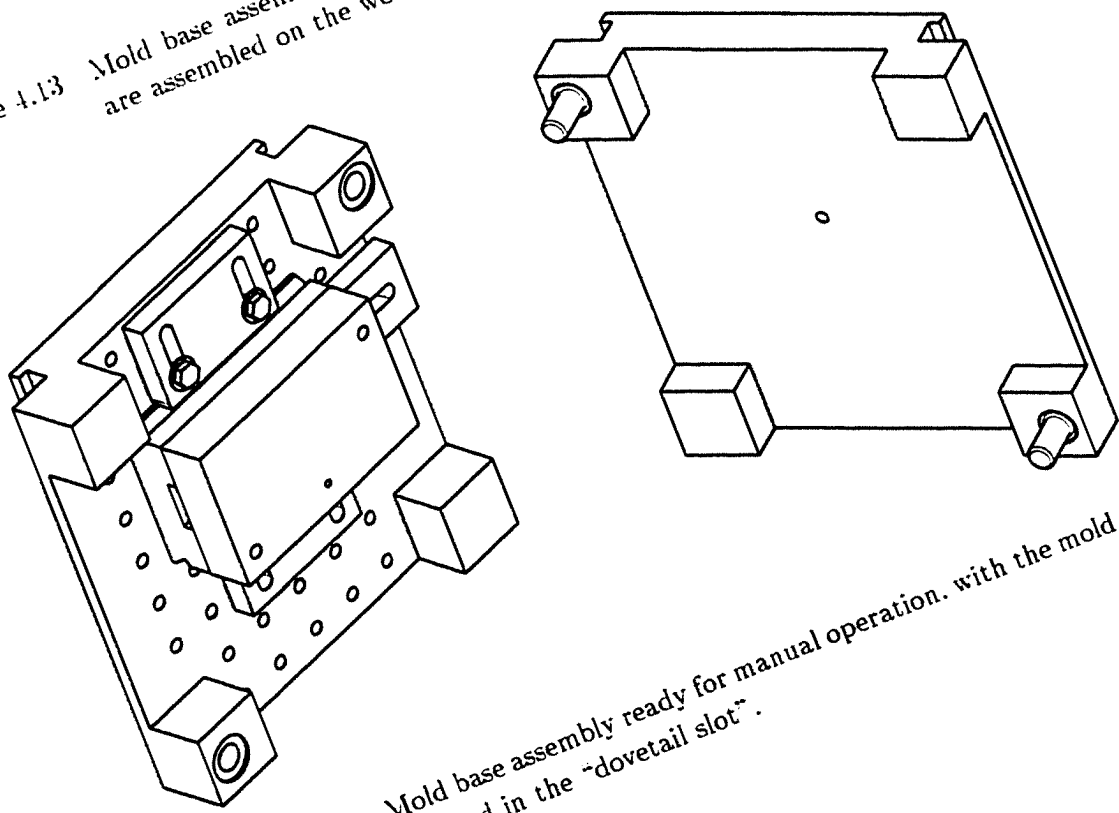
Mold base assembly ready for manual operation, with the mold engaged in the "dovetail slot".
